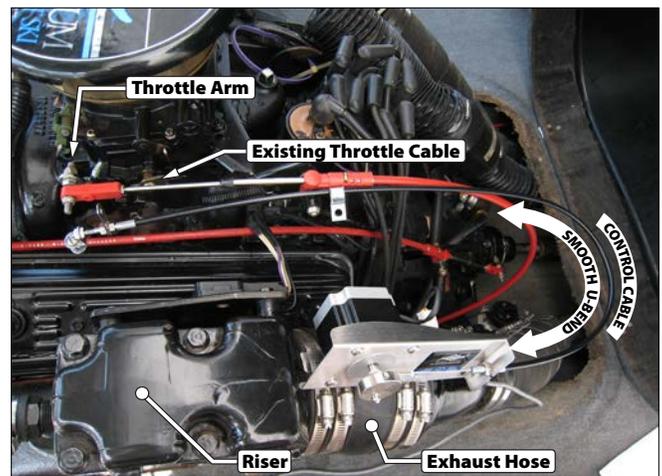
Throttle motor housing mounted on exhaust hose, showing control cable temporarily placed near existing throttle cable with end near throttle arm (note smooth U-bend in cable)
